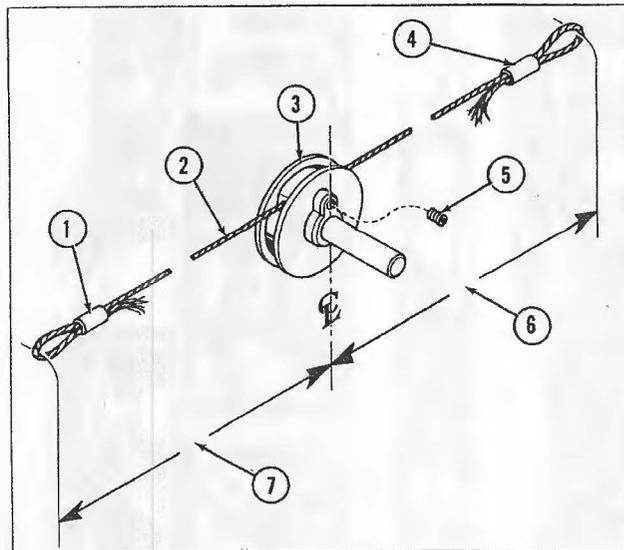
TURNTABLE CABLE AND DRIVE PULLEY
